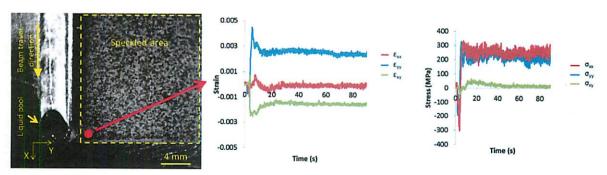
Real-time strain and stress monitoring during a laser welding process
